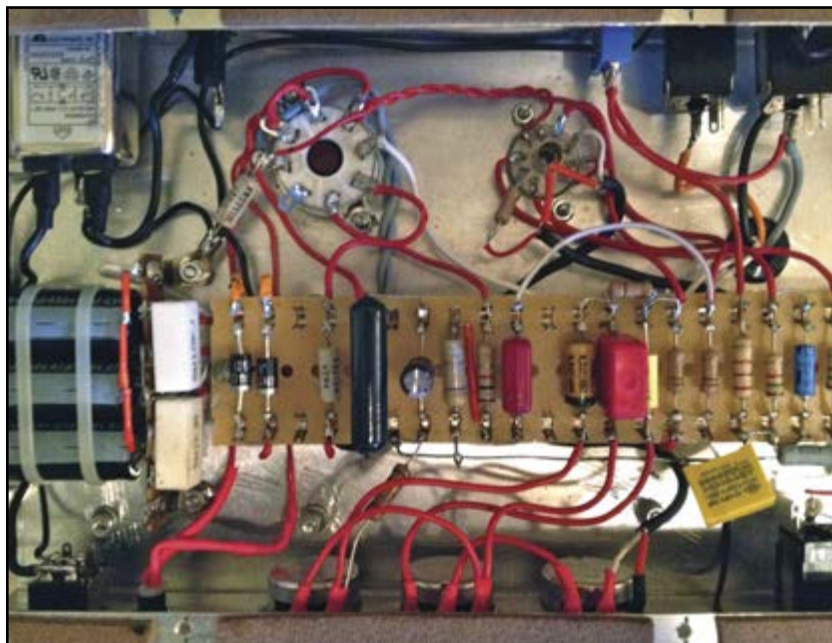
To complete the wiring, I connected all the parts directly from tube sockets and input/output jacks to the tag board.
